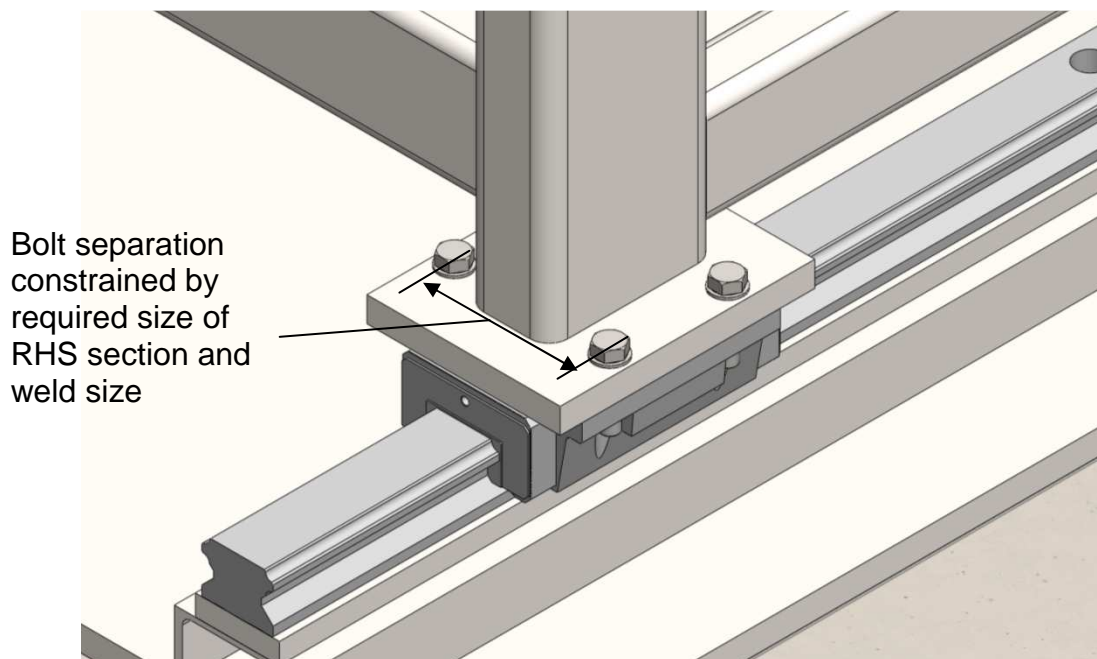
Shuttle frame structure supported by THK linear guide. Note the bolting arrangement constrained by the size of the RHS section in view.
